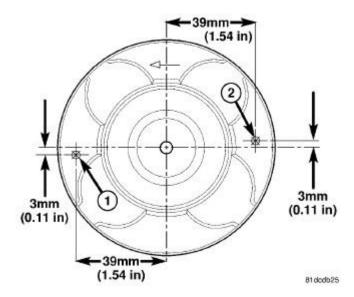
Piston Protrusion Measurement Courtesy of CHRYSLER LLC
